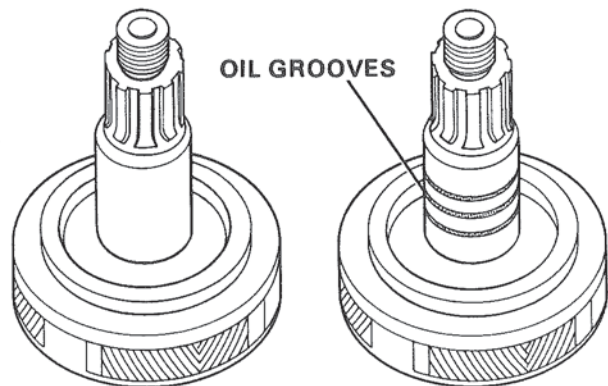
Late and Early Model Pinion Cage and Output Shaft.
